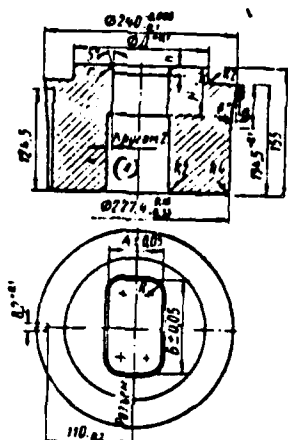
Drawing/draft of matrix/die for extrusion/pressing of blanks for stamping.
